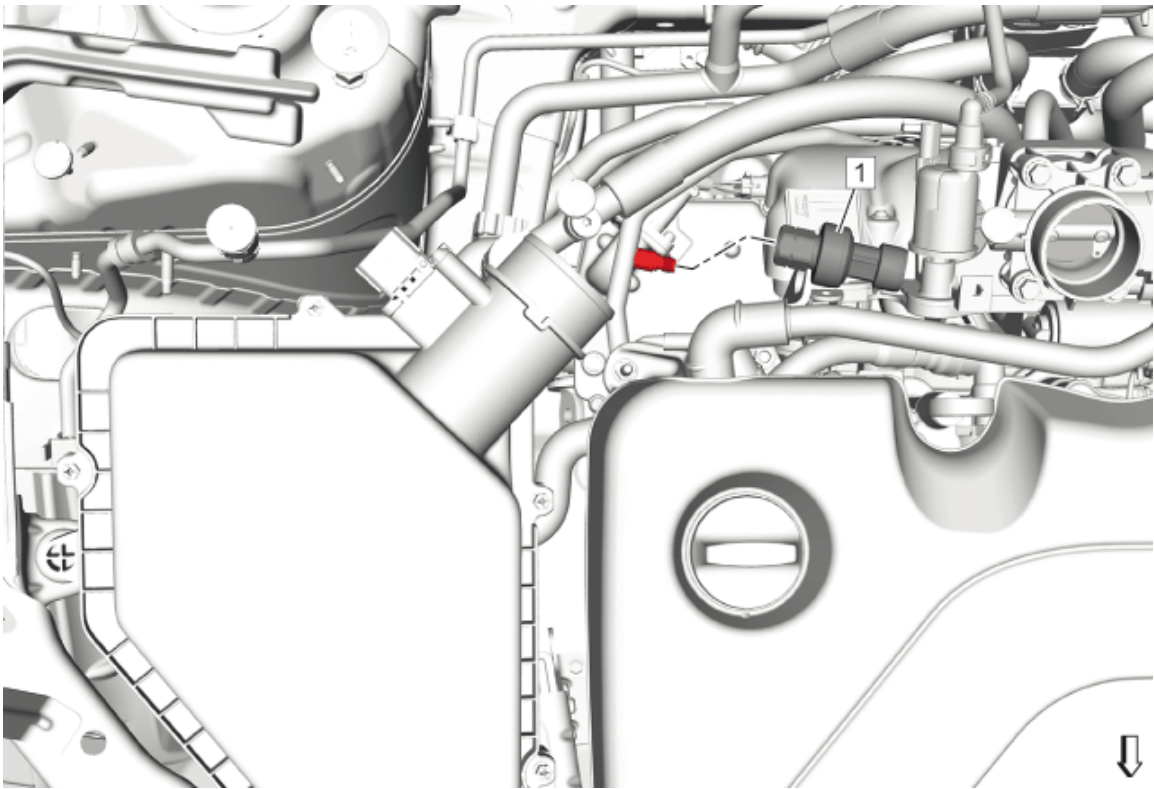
Air Conditioning Compressor High Pressure Cut Off Switch
